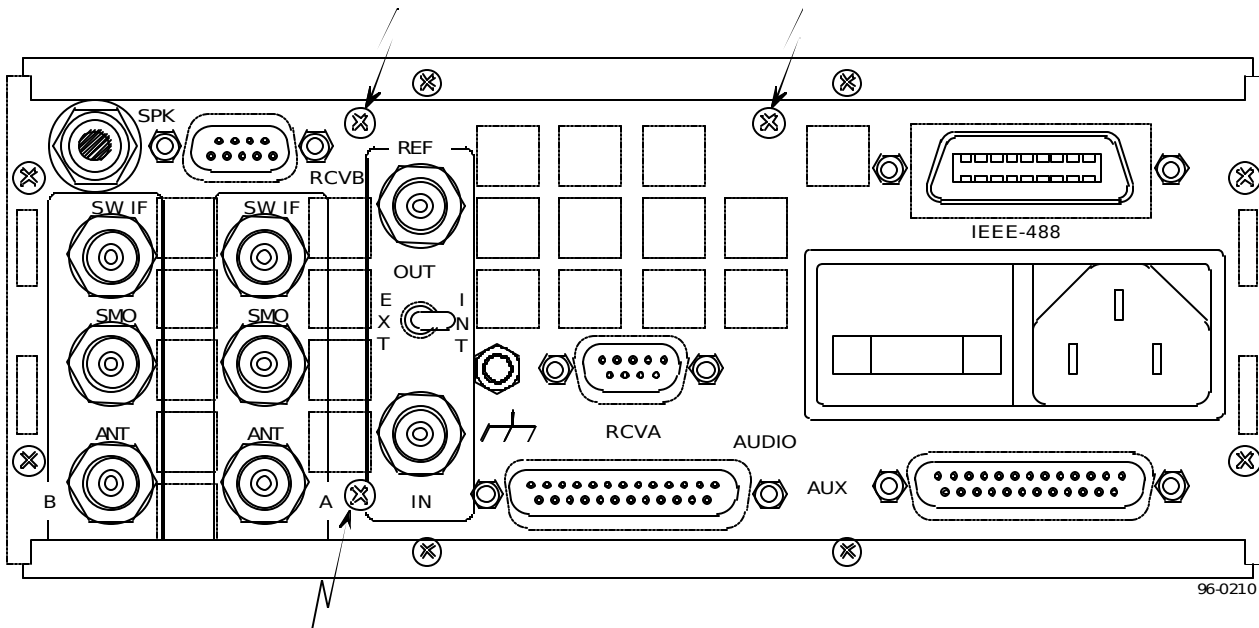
Rear Panel Reference Generator (A9) Main Chassis Screws
